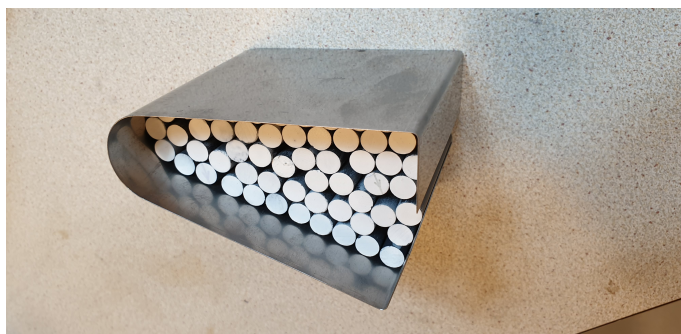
An example of rods (in this picture exclusively 10 mm rods) placed in a mould.
